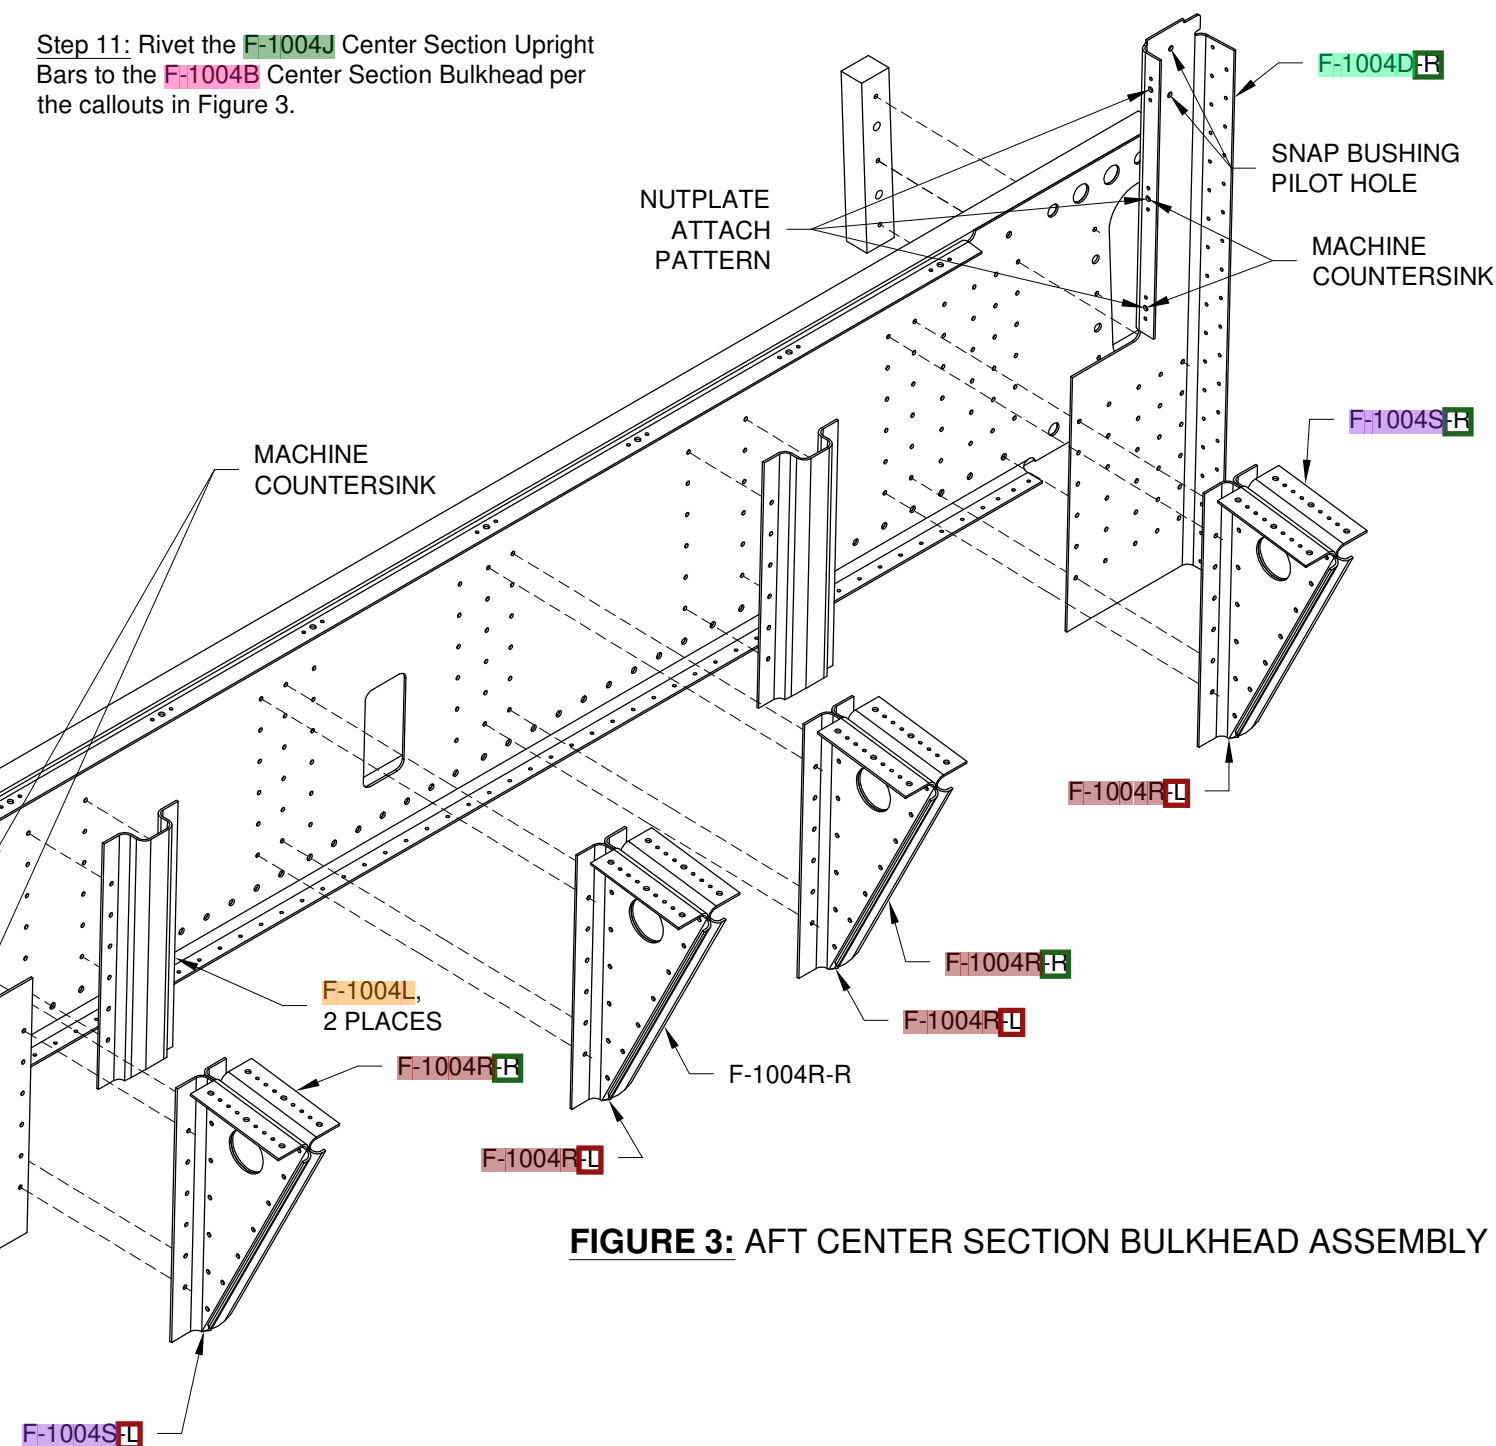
AFT CENTER SECTION BULKHEAD ASSEMBLY
